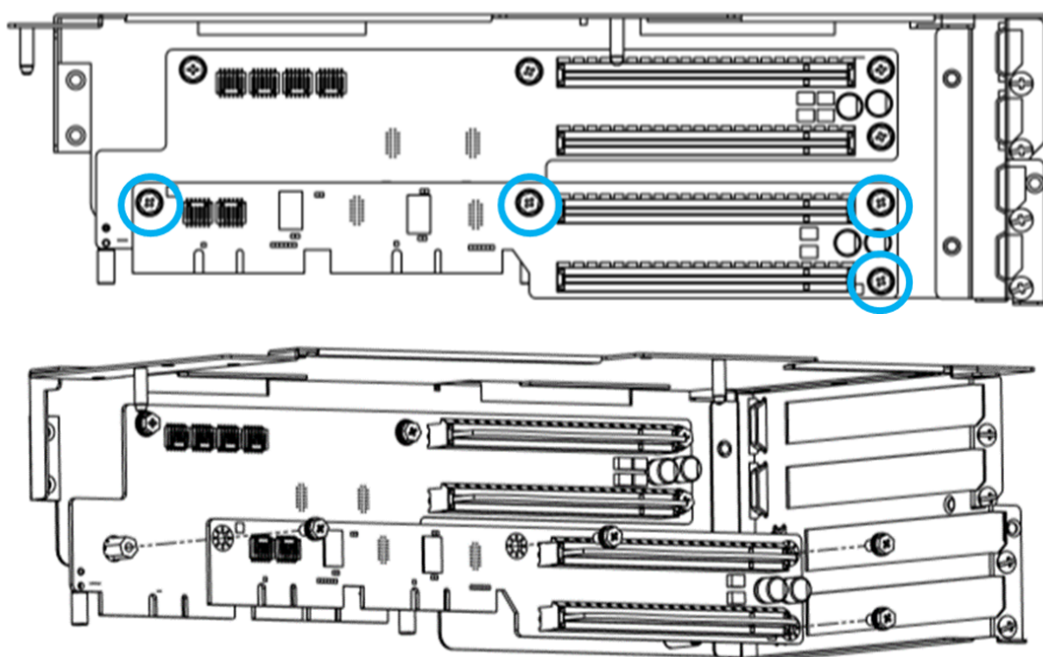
LR Riser Card Assembly/LR 卡安装 /LR 卡安装
